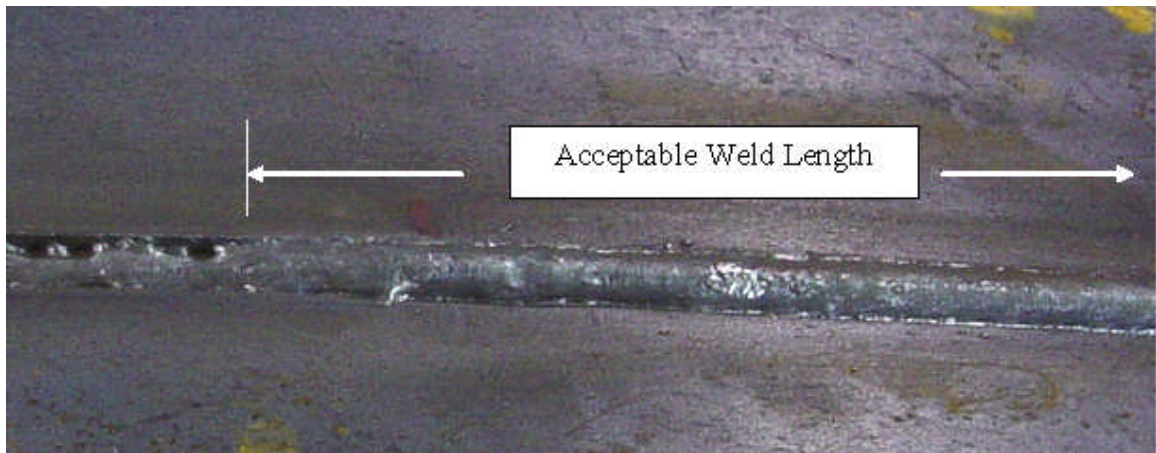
Illustration of a Skip, or Incomplete Fusion, Encountered During Welding Denoting the End of the Acceptable Weld
